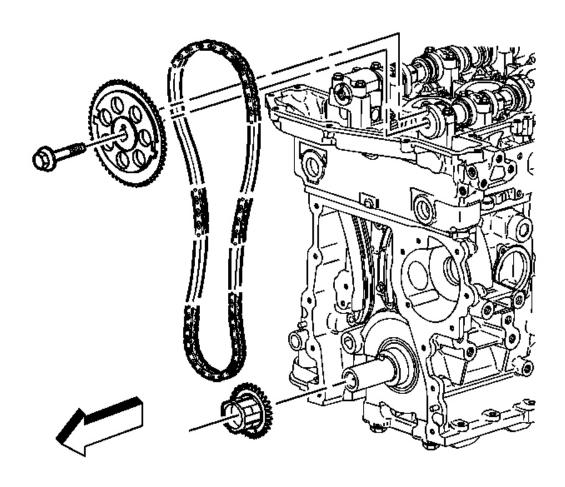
View Of Timing Chain & Sprockets Courtesy of GENERAL MOTORS CORP.
